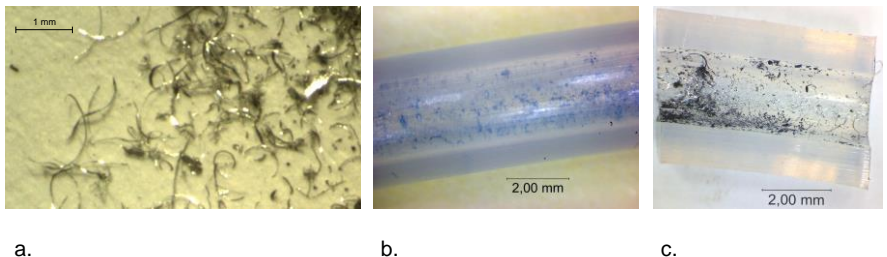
Aluminum welding wire: Long particles taken off a \varnothing 0.9 mm aluminum wire (a), that had been shaved before final drawing. Particles (b), (c) stuck in a PTFE liner that had been cleaned on the inside. These particles create more particles in an avalanche effect, blocking the liner and contact tip.
